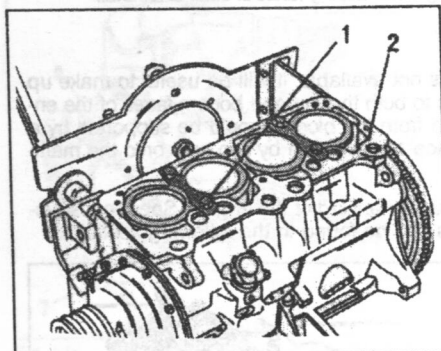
Cylinder liners can be clamped in position with two clamps (1) as shown. Bolt the clamps to the block (2).
